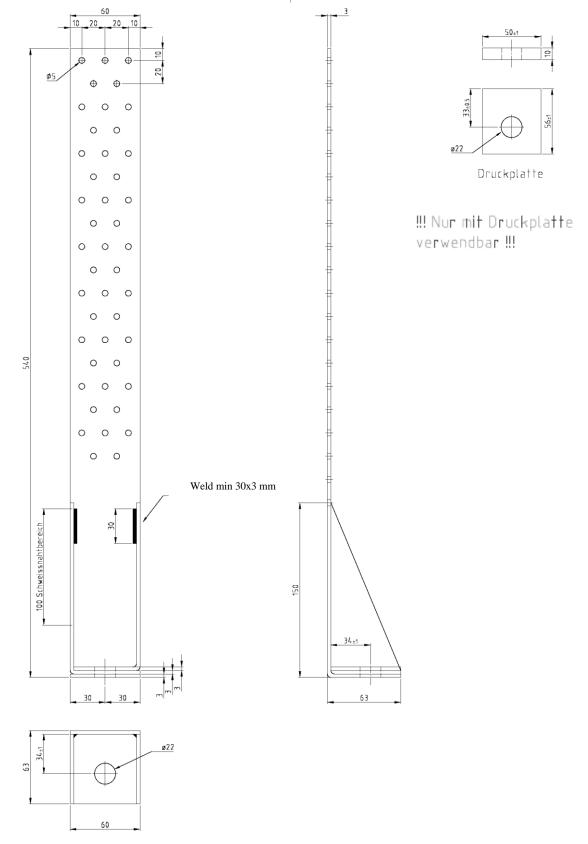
Dimensions of type WHT540 Big Hole (with washer 56x50x10)
